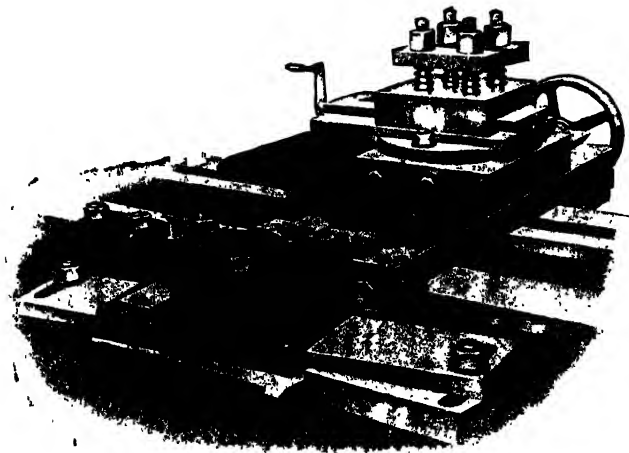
Taper Turning Attachment, by Messrs John Lang.
